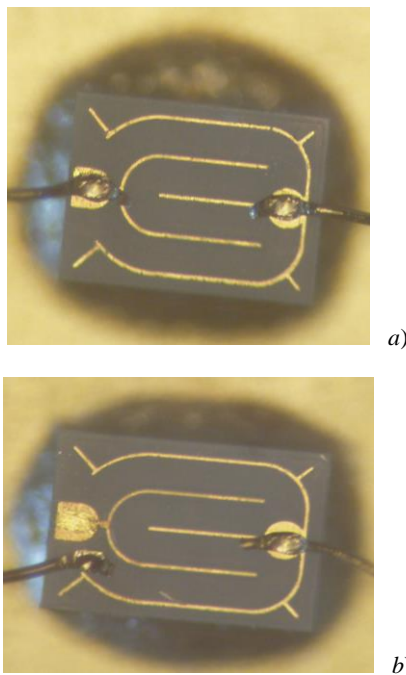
Photos of chips with drawn contacts (a) and defect of soldering the contact (b).
